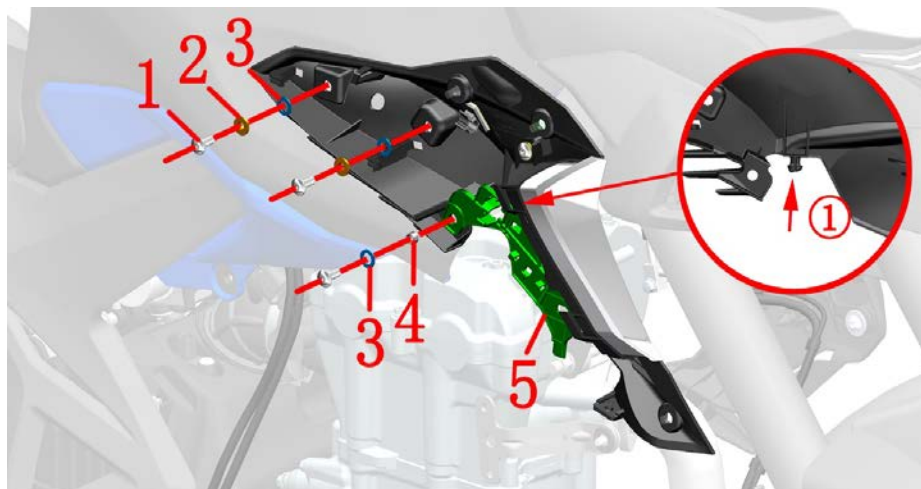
Fuel Tank Assembly		Fuel Tank Decorative Cover Rear Shell Assembly 2	CHK	CAUTION
